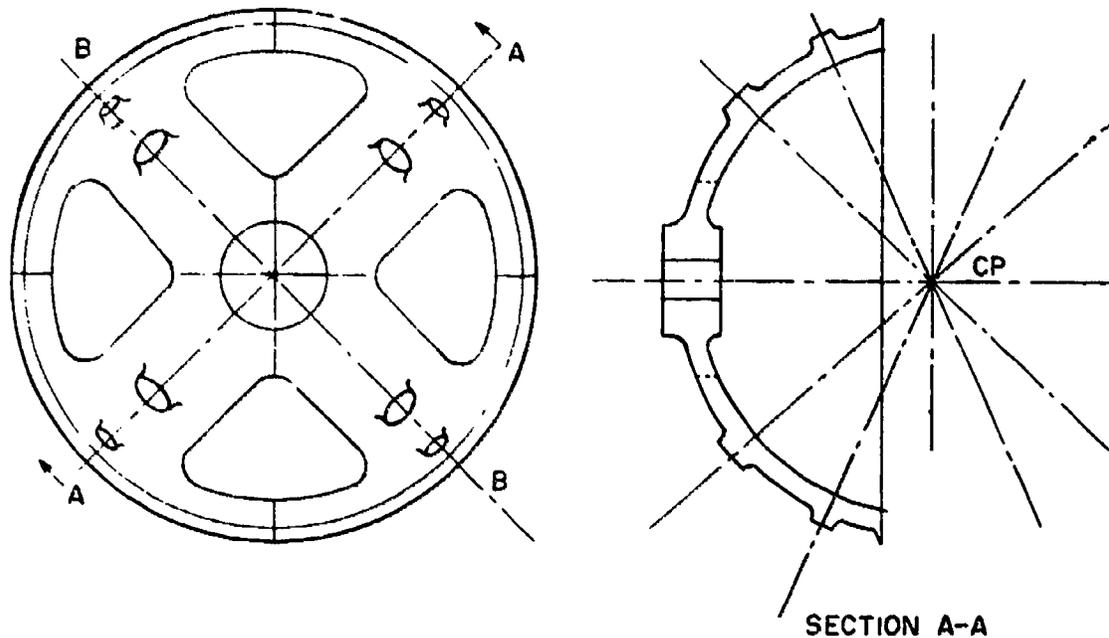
Layout of the side cutouts on the loose piece for the inner wall thickness.
